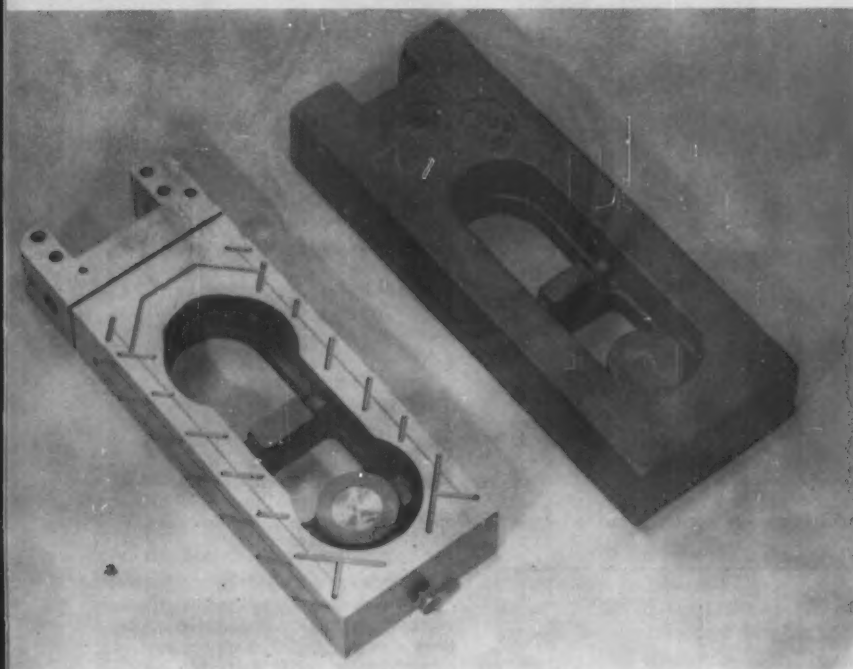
It cost \$375 to machine and finish 100% x-rayed, \$2 casting.
